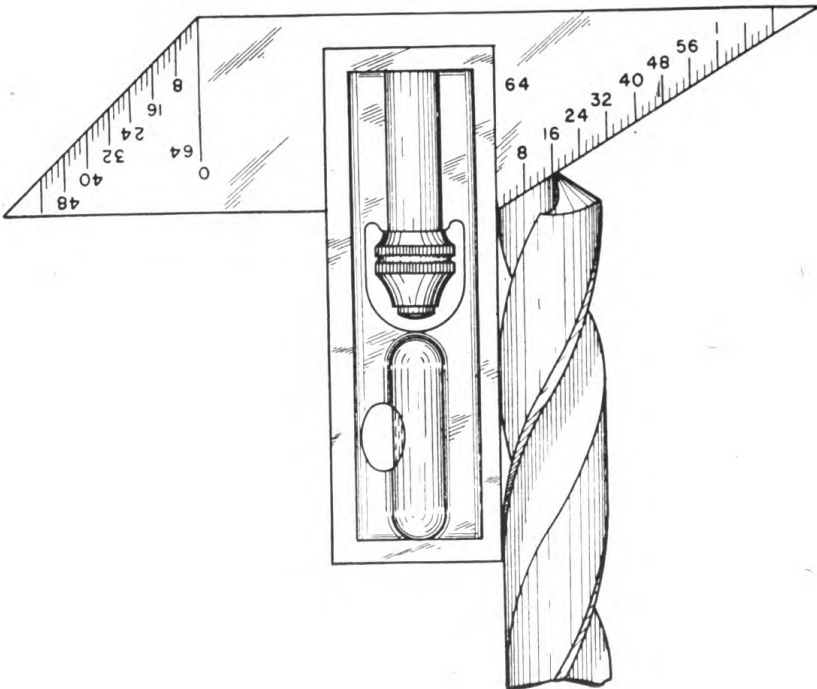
Measuring the length of drill cutting lip with a rule.
